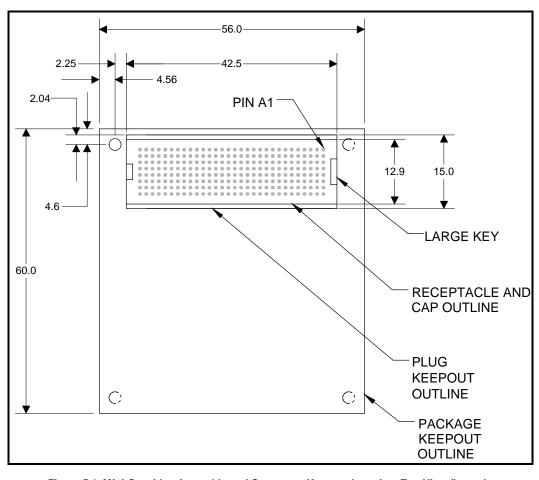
Mini-Cartridge Assembly and Connector Keepout Location, Top View (in mm)
